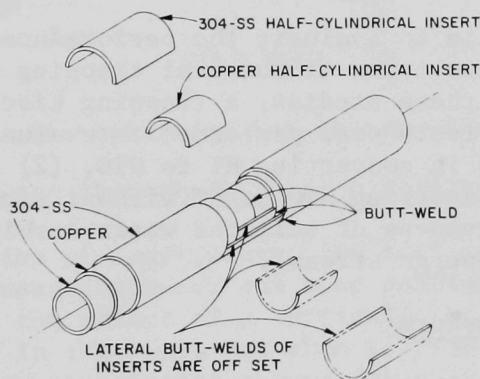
Contiguous Butt-Weld of a 304-SS/Copper/304-SS Metal Composite Tube
